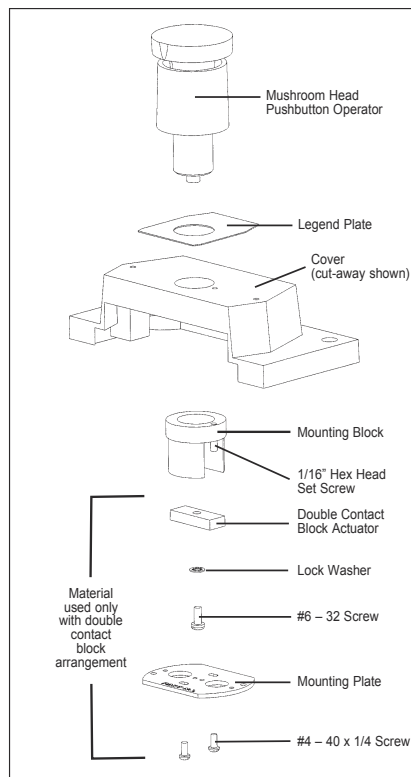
Assembly of Momentary Mushroom Head Pushbutton Operator
